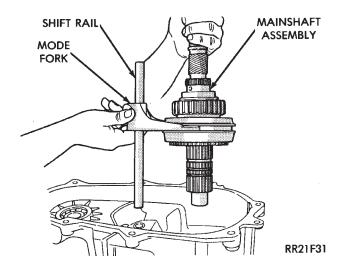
Removing Mainshaft, Mode Fork And Shift Rail
